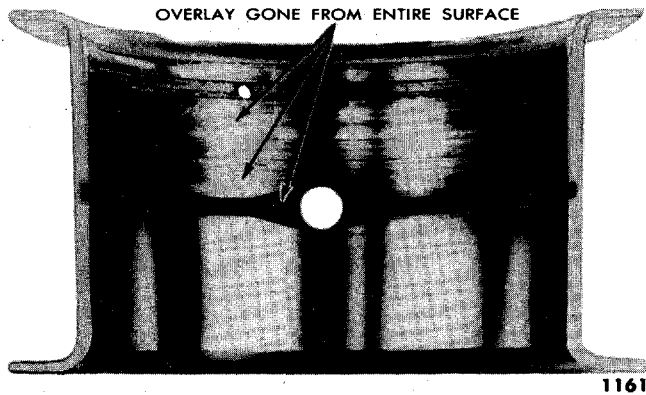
Bearing Failure Due to Tapered Journal
